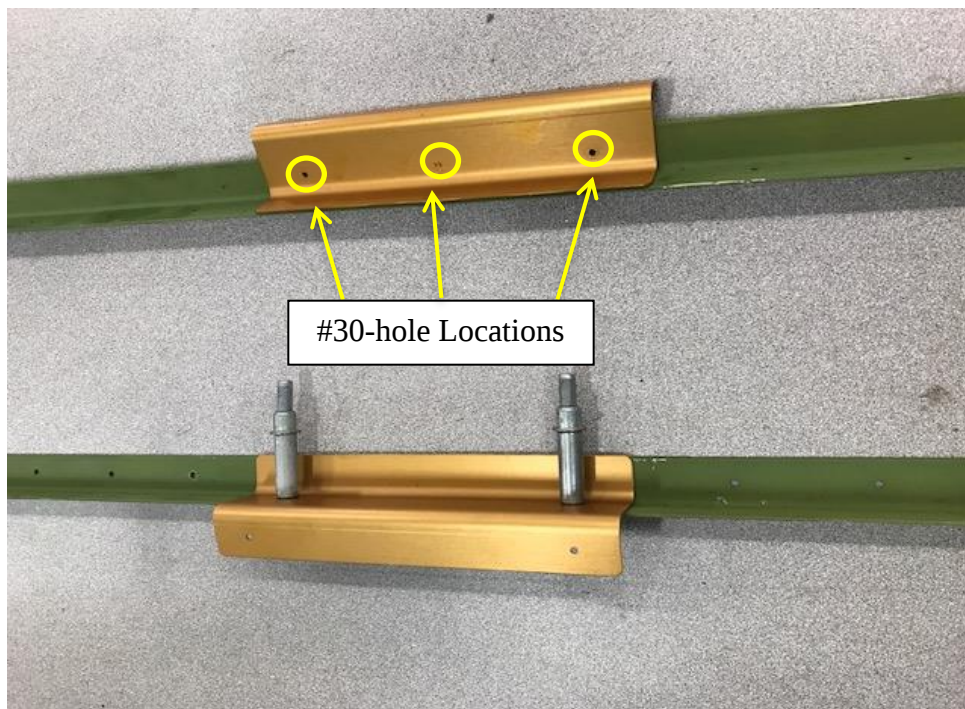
RIVET HOLE AND CLECO TEMPORARY FASTENER LOCATIONS
